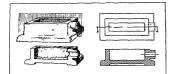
ASSEMBLY DRAWING WITH PIECE NUMBERS
